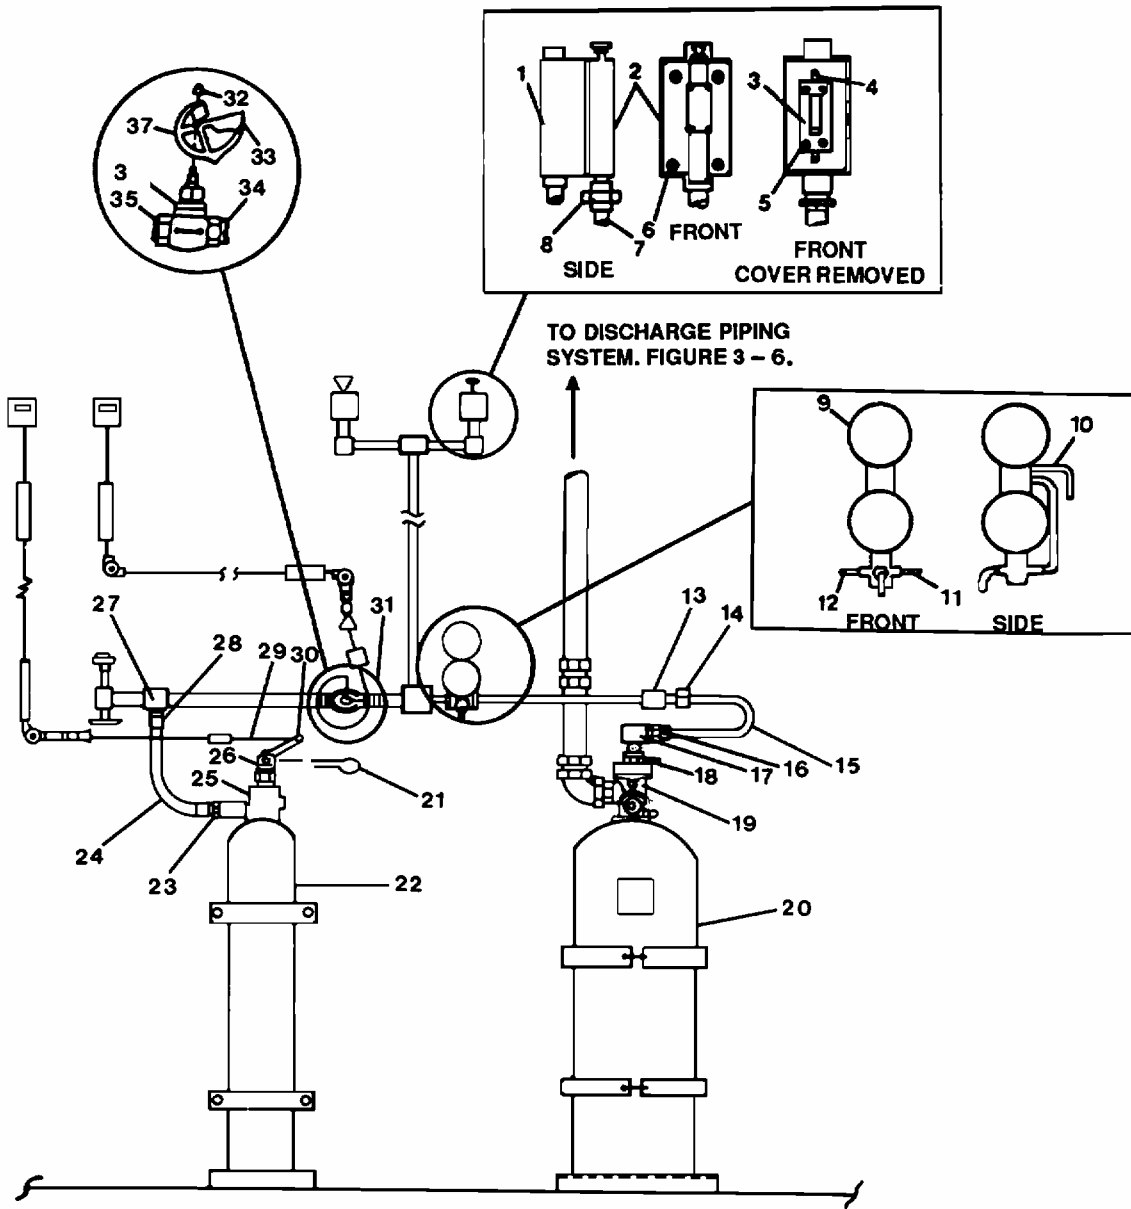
Halon Subsystem - Paint Locker/Main Machinery Room.
